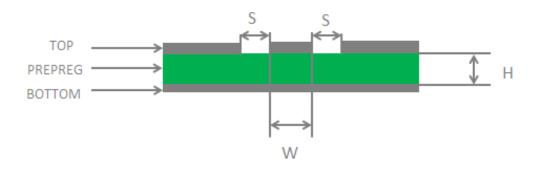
Coplanar Waveguide Line Design on a 2-layer PCB
